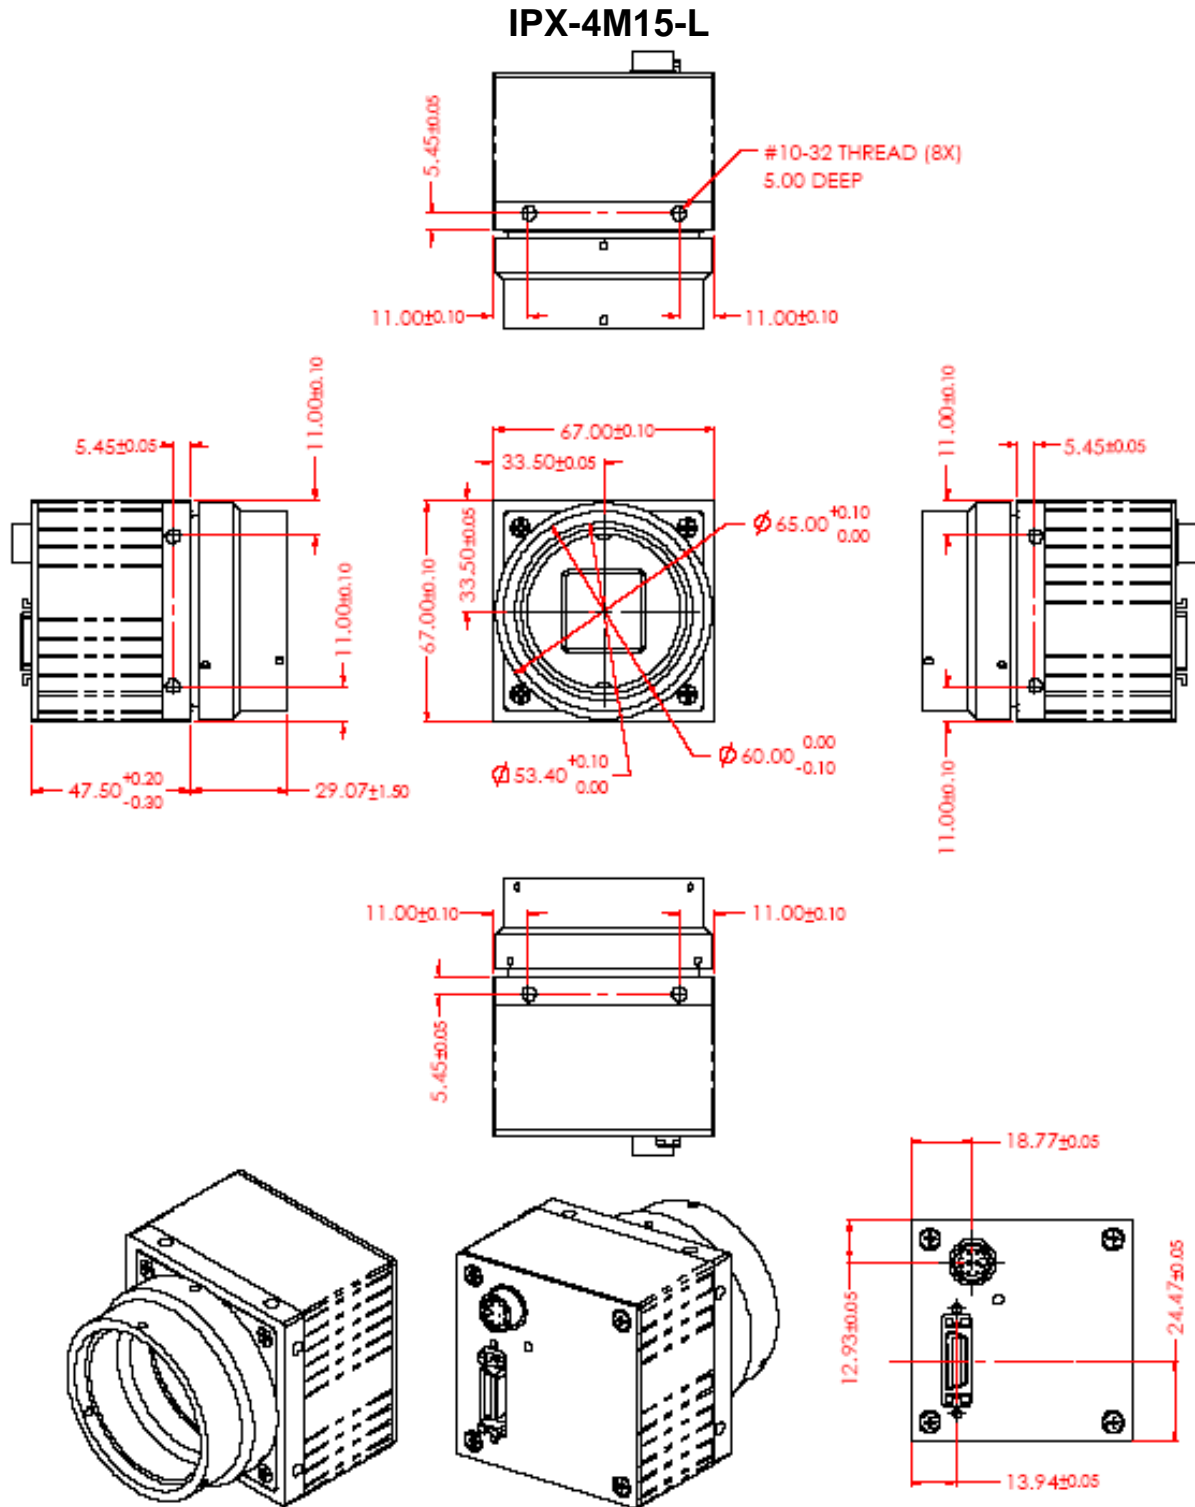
IPX-4M15-L Dimensional Drawings
